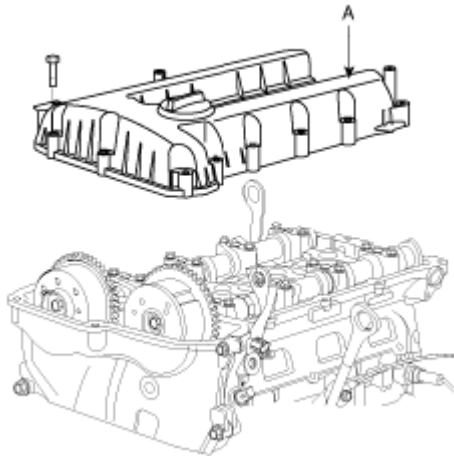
Identifying Cylinder Head Cover Bolts And Cover
